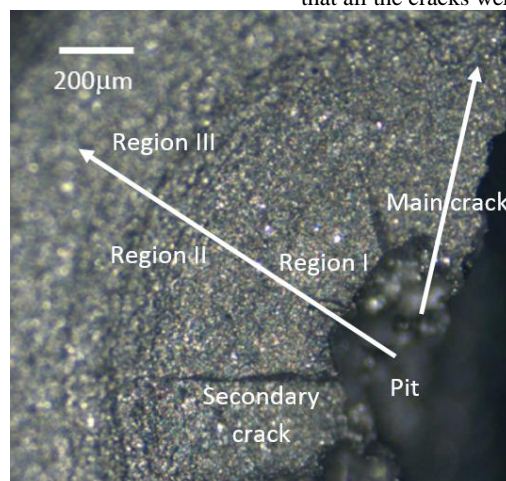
IFM fracture surface morphology for 316L SS after corrosion fatigue test, the axial tensile cycling loading direction is perpendicular to the image.
